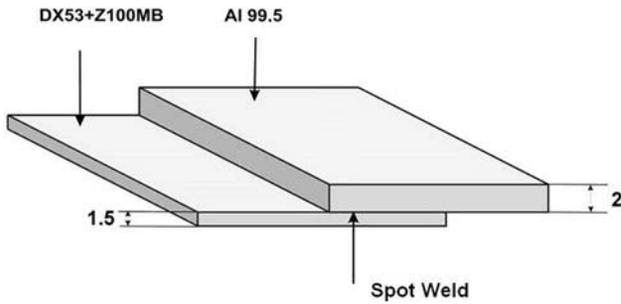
Positioning of plates for the welding/brazing.
